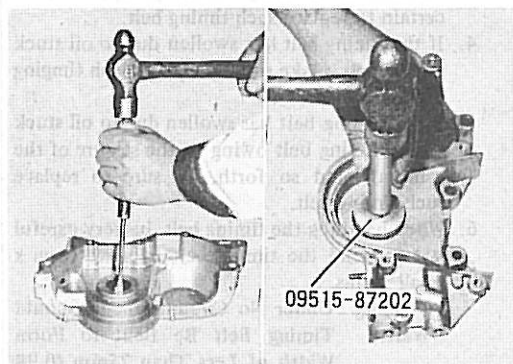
Replacing Crankshaft Front Oil Seal
